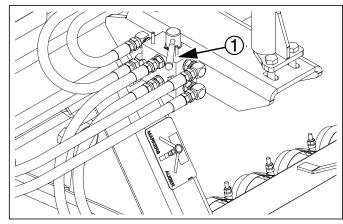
20 ADC2350/E Diverter Valve (to Auger)
